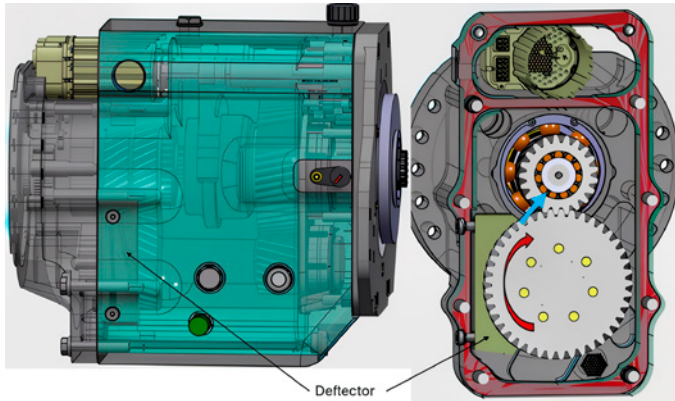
Two-speed gearbox isometric and cutaway views showing the deflector.
